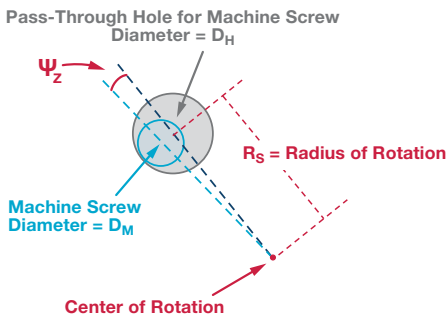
Mounting screw/hole impact on z-axis skew angle.
